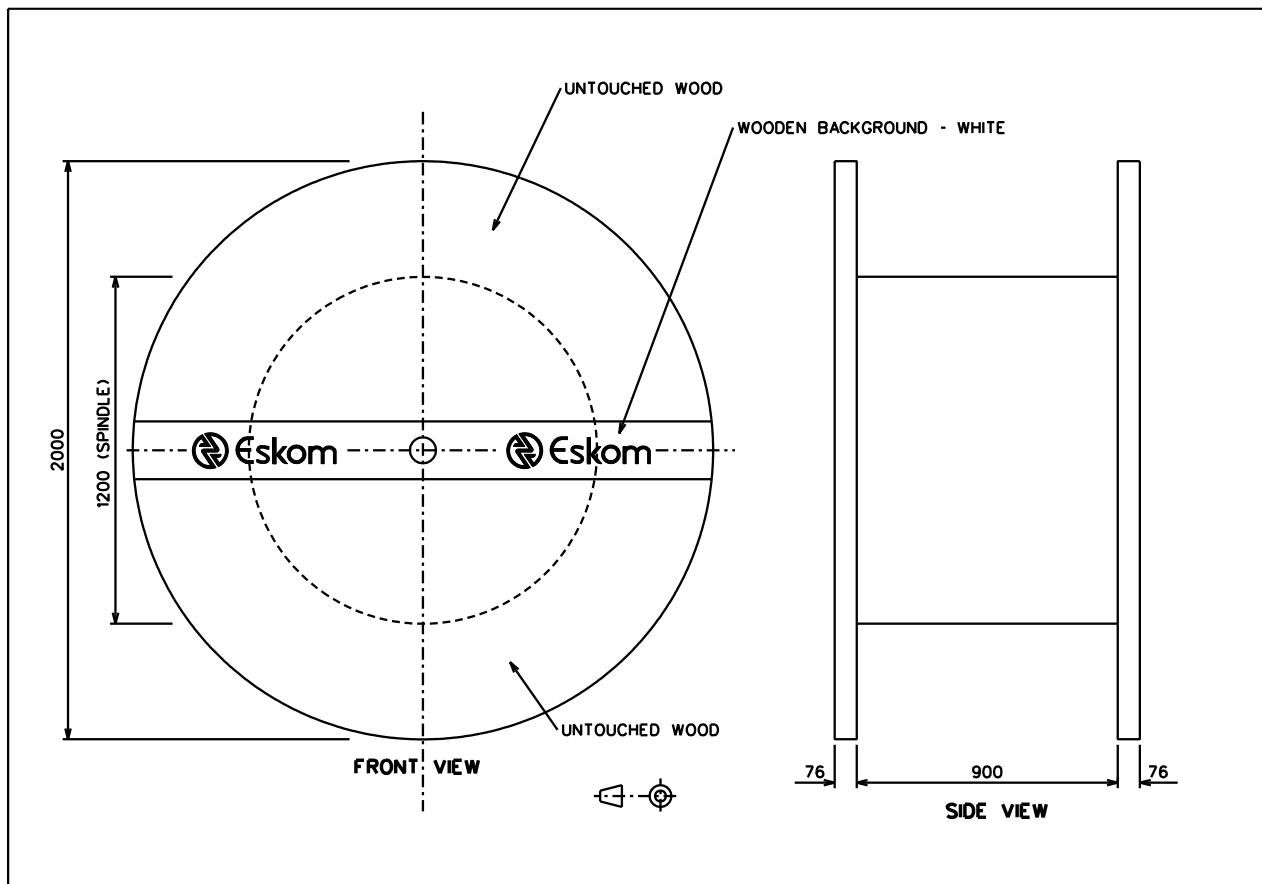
typical wooden drum side and front view showing Eskom branded flange
